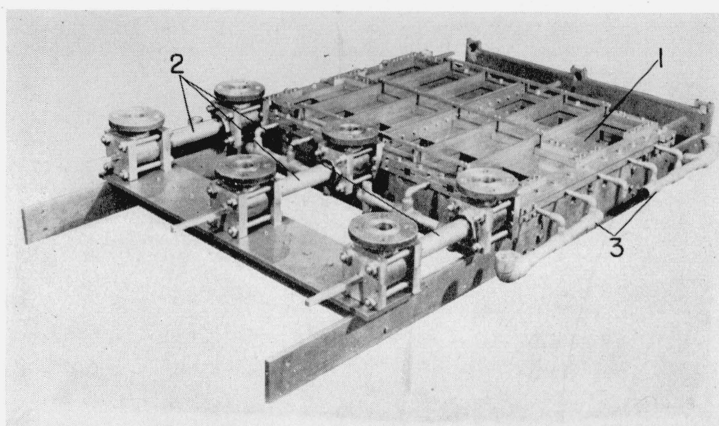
Large slide valve nearly ready for installation, viewed from the top or inlet side.
